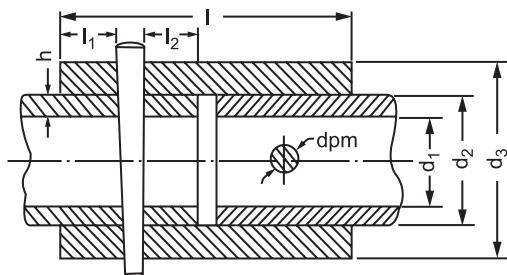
Sleeve and tapered pin joint for hollow shafts.
